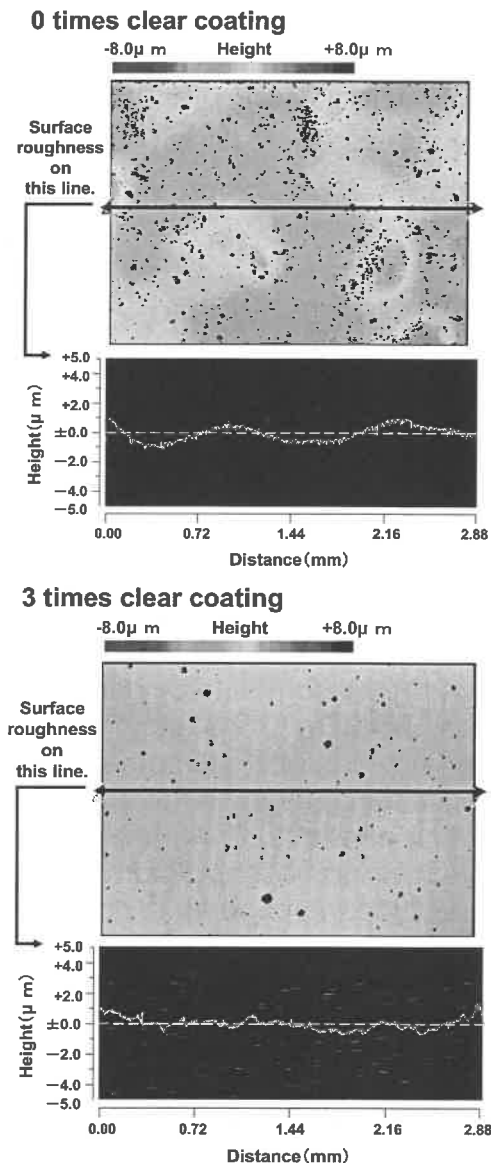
Surfaces of metal sheets after performing clear coatings 0 and 3 times.
